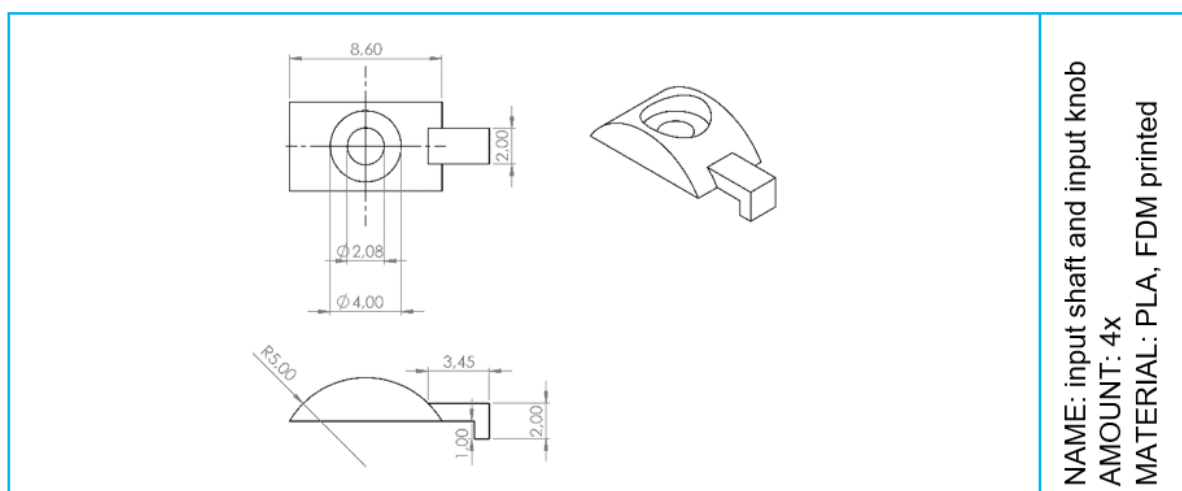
Construction drawings of the pins of the input knob - 3D Printed prototype
